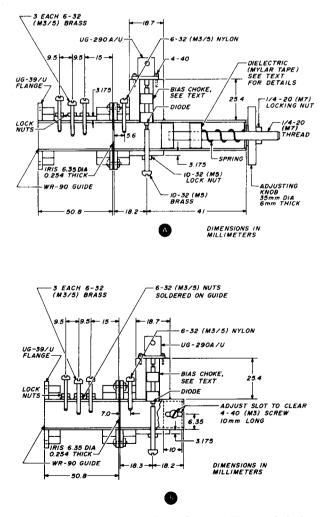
Assembly drawings of two Gunn oscillators. A design using an adjustable choke plunger backshort is shown in A. The oscillator in B has an adjustable contacting backshort that can be locked into place.
